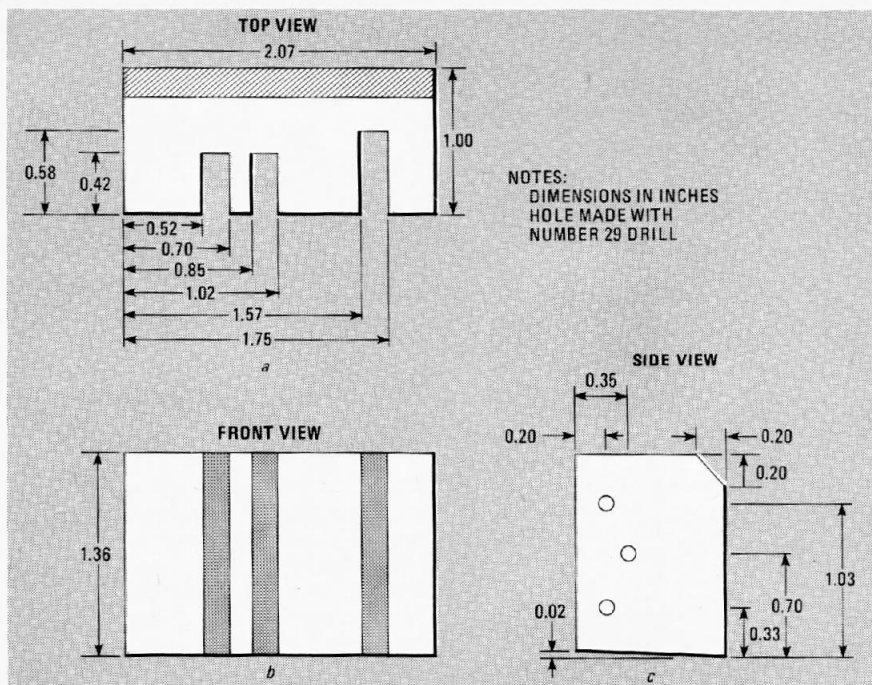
BEARING BLOCK DIMENSIONS must be followed closely. The dimensions shown are in inches. All holes are made with a #29 drill.
